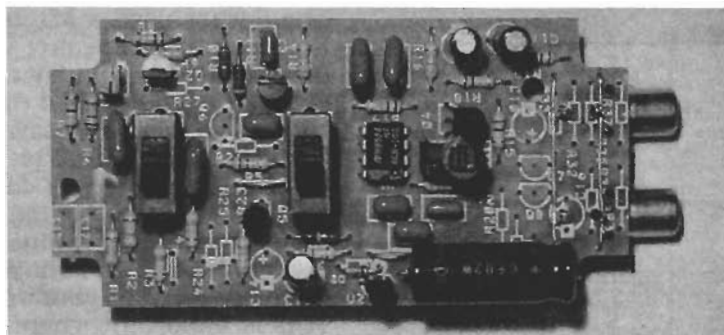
PROTOTYPE CROSSOVER BOARD. The two RCA output jacks are mounted on the underside of the board, and the electrical connections are made by soldering the jack leads to the two wire jumpers that span the board.
